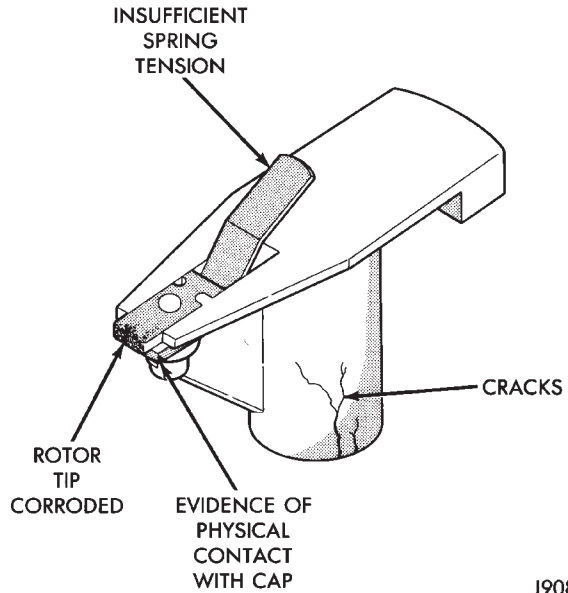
Rotor Inspection—5.2L Engine—Typical
